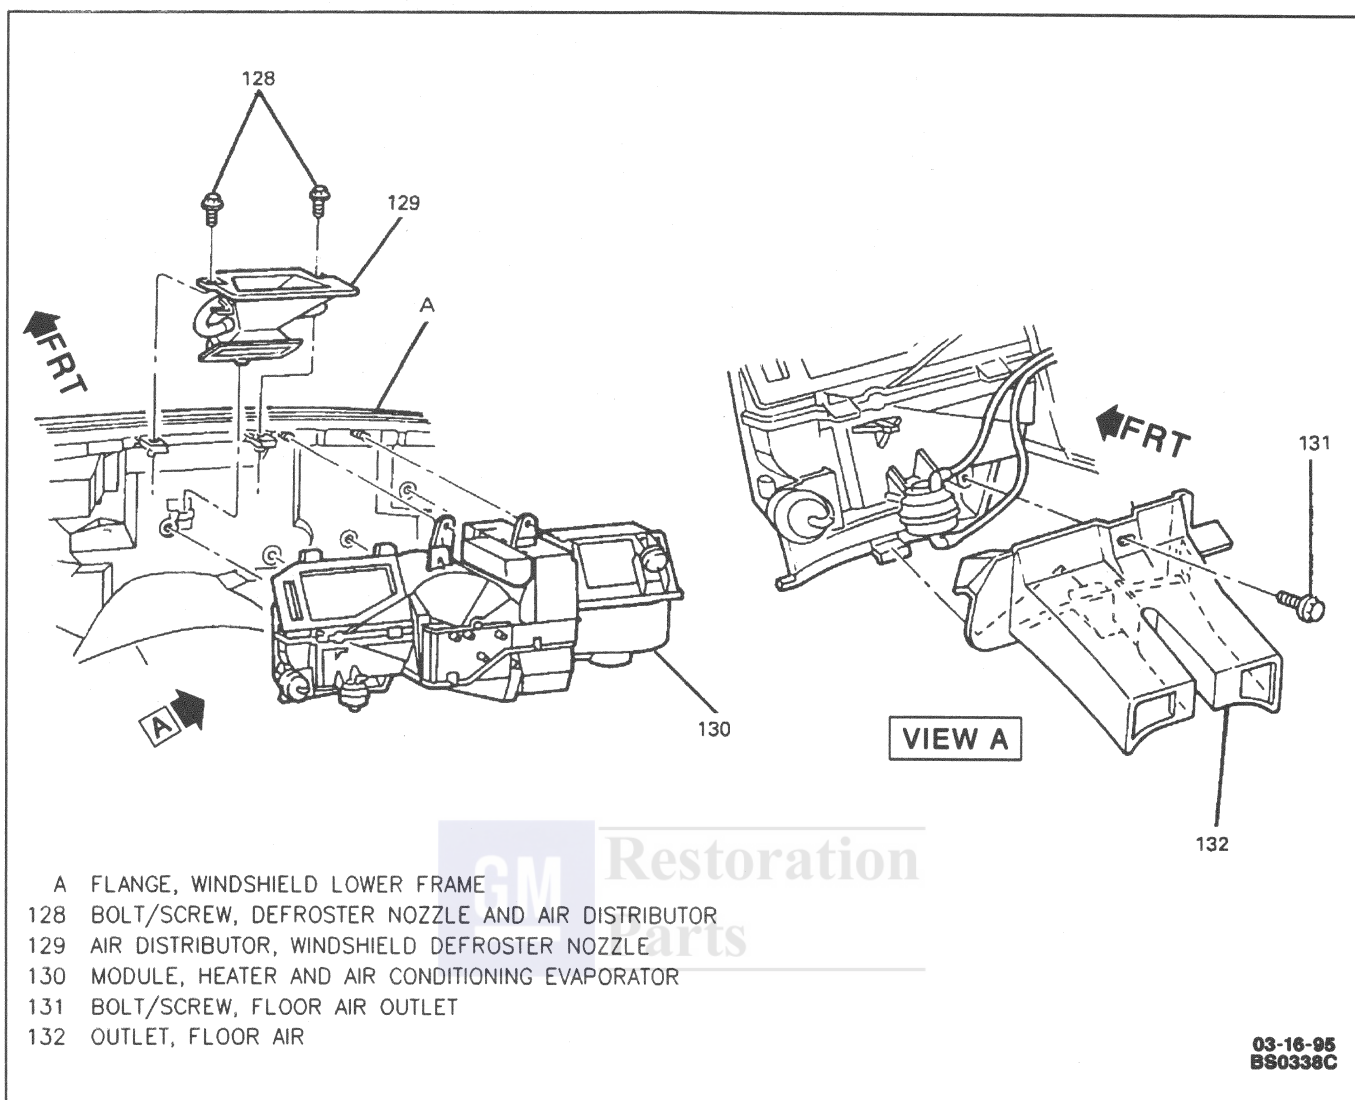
Windshield Defroster Nozzle and Floor Air Outlets
